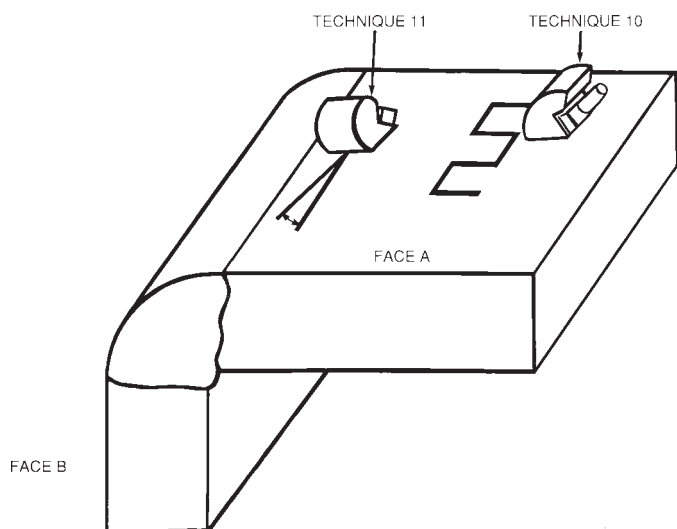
Techniques 10 and 11, for Inspecting Full-Penetration Double-Fillet Corner Welds
